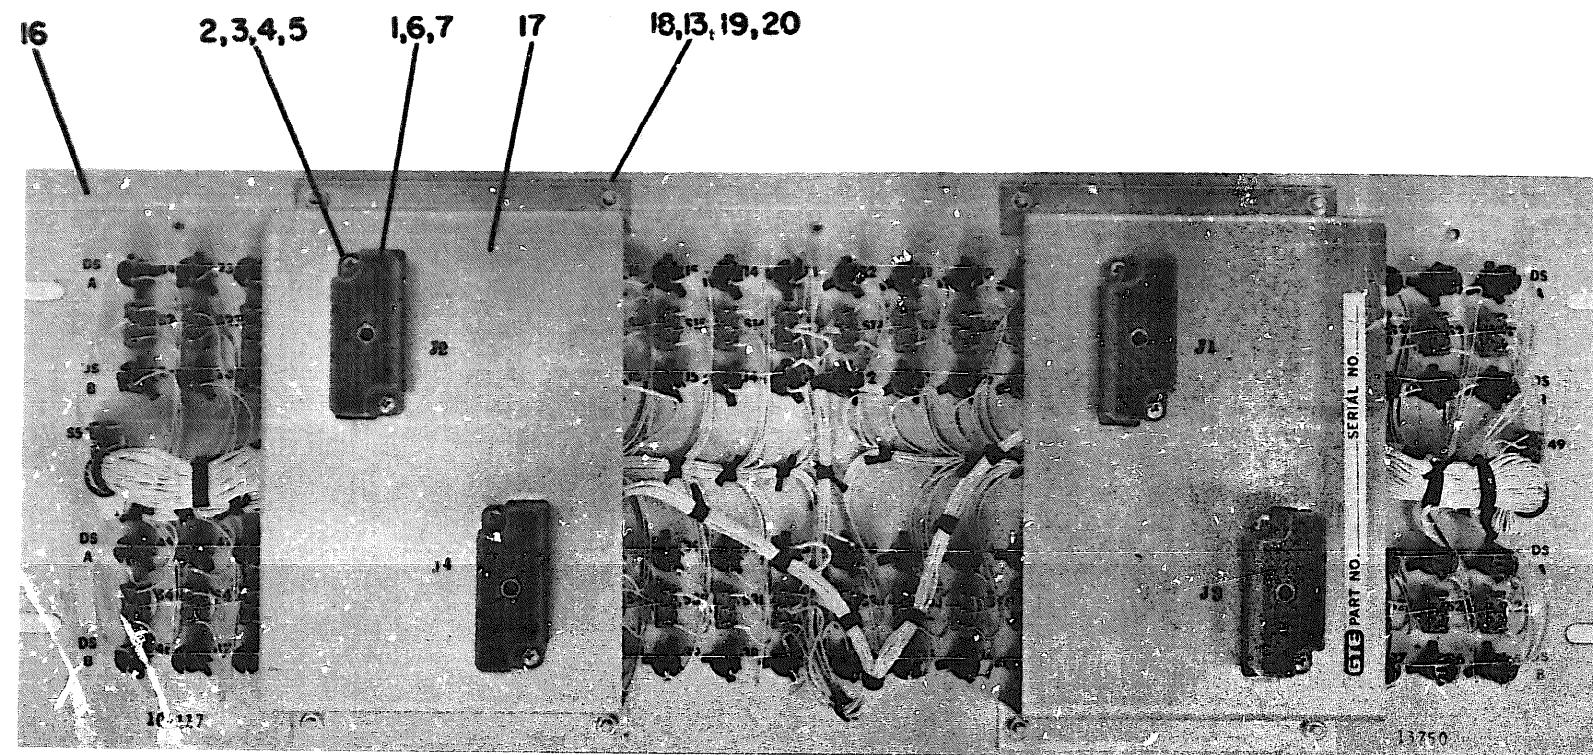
, Master Control Panel Assembly (Sheet 1 of 3)
